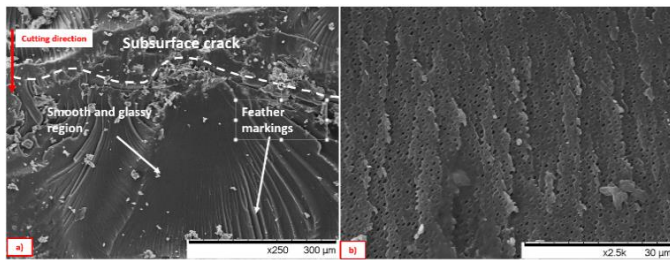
SEM micrographs of the machined surfaces for a) Si20 b) R20
